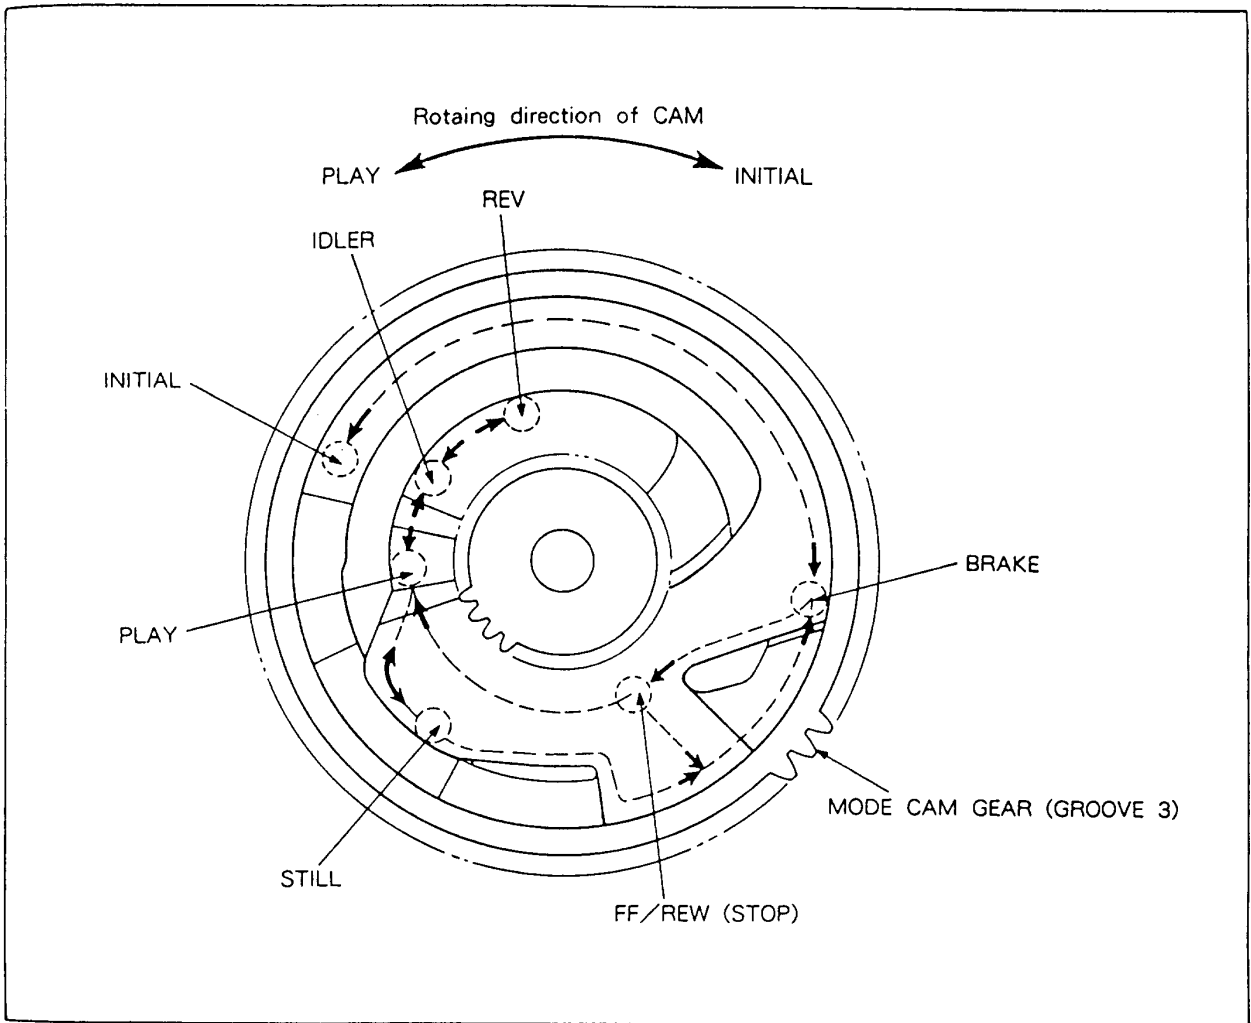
POSITIONING OF BRAKE CAM SLIDE-PIN ON THE GROOVE 3 OF MODE CAM GEAR
